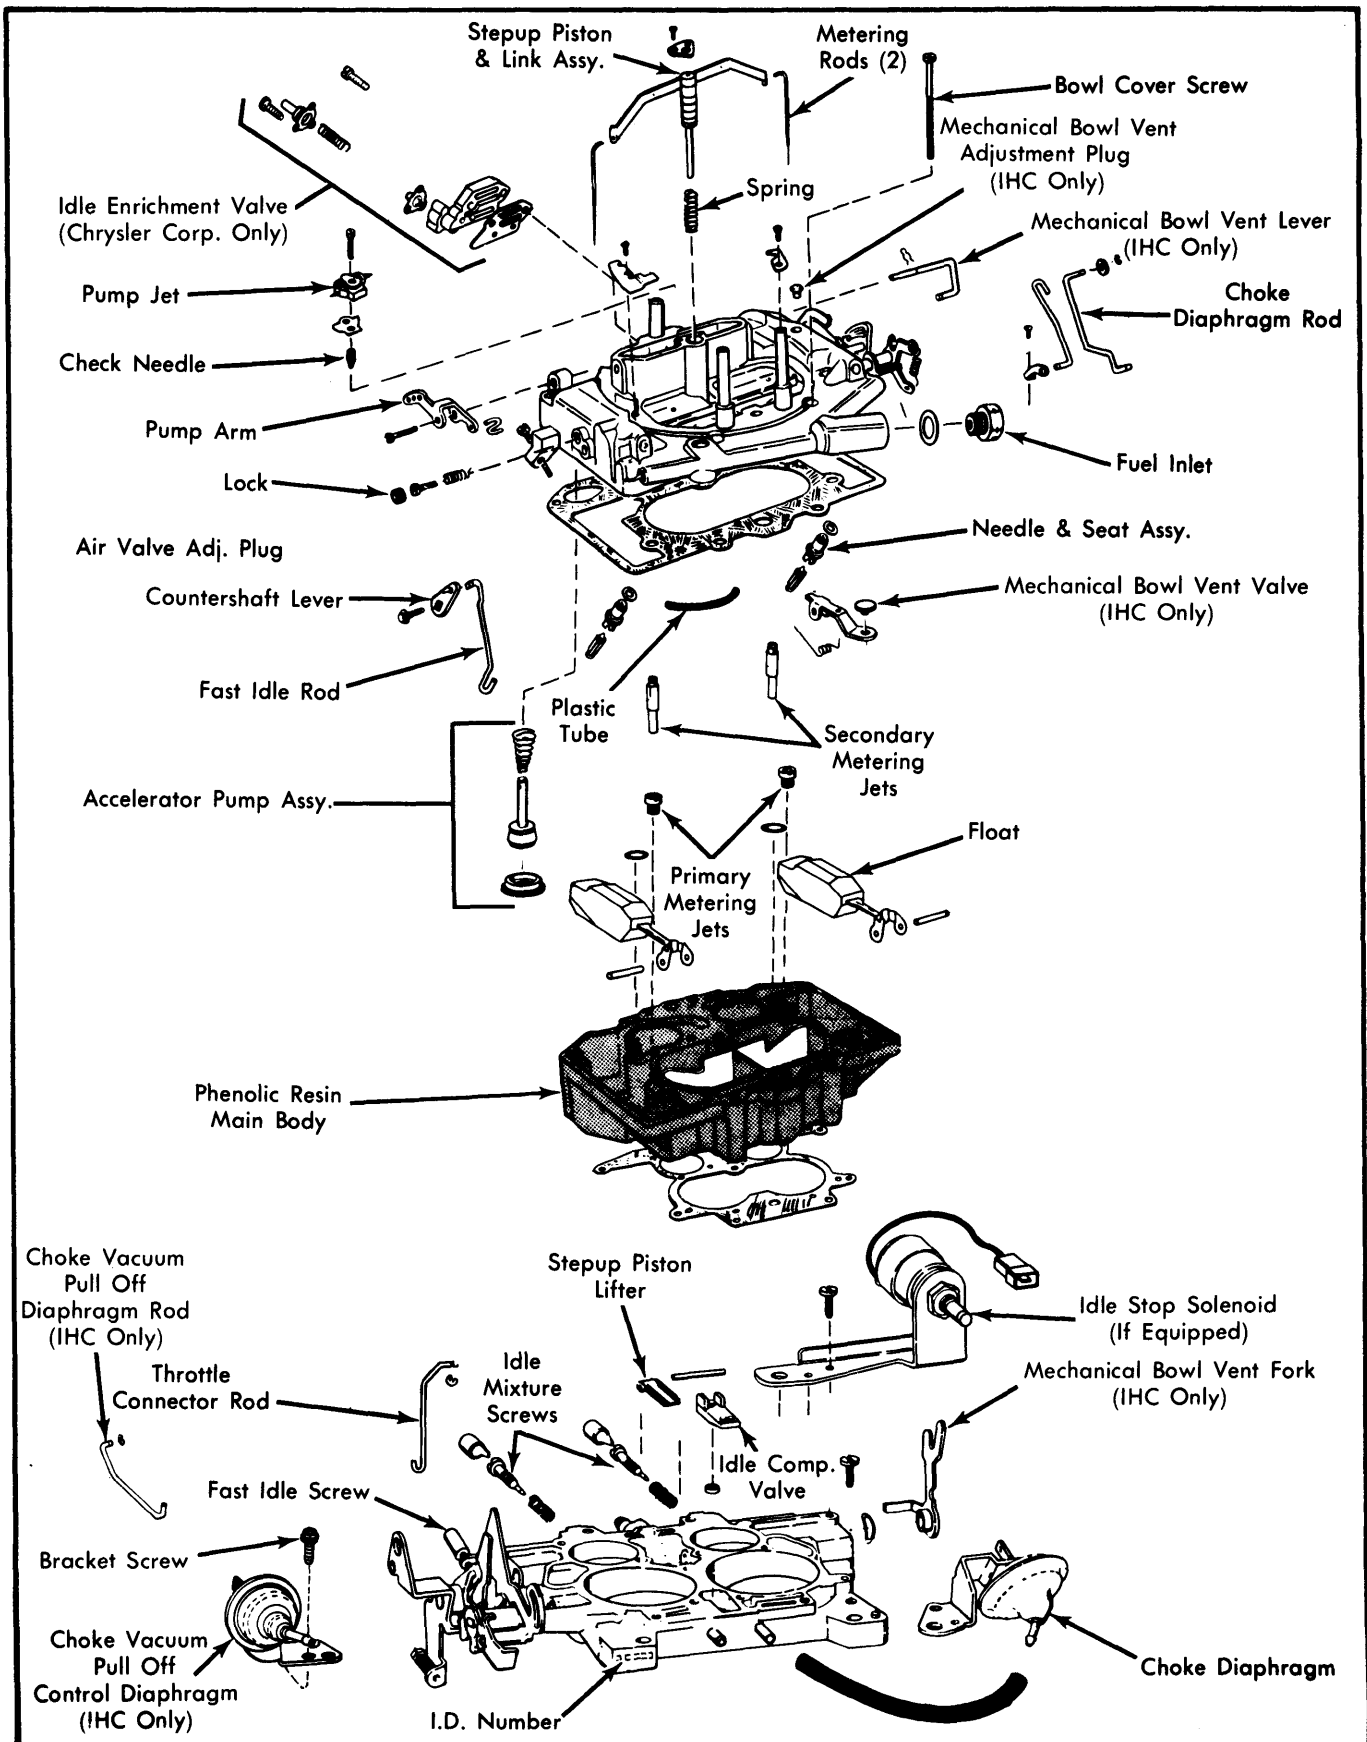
Exploded View of Carter Thermo-Quad 4-Barrel Carburetor
